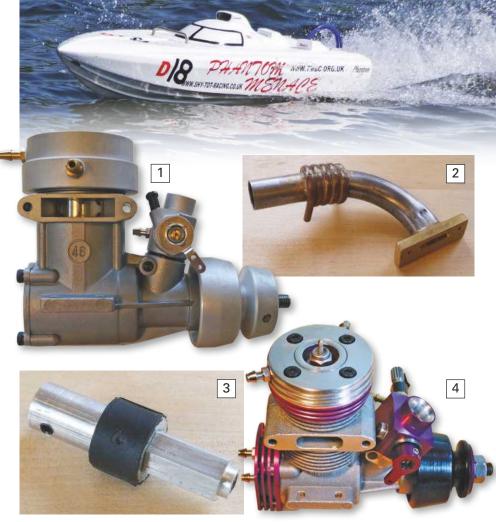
shows the coupling which delivers the power from the engine to (in this case) a solid propeller shaft. This coupling, also hand-made by Bernard, incorporates two alloy sleeves machined plain at one end to take a solid steel propeller shaft with a grub screw for clamping in-situ. At the other end, the sleeve is tapped to match the threads of the 1/4 UNF engine crankshaft. In the middle is a rubber bobbin which reduces vibration and noise and allows for a very small amount of misalignment. Ideally of course, it should be perfect, but we are all human! Photo 4 shows a West 28 engine (4.5cc capacity) which qualifies for the smaller AA class. This engine incorporates a watercooled backplate and its components are beautifully machined giving a feel of quality, right out of the box.
